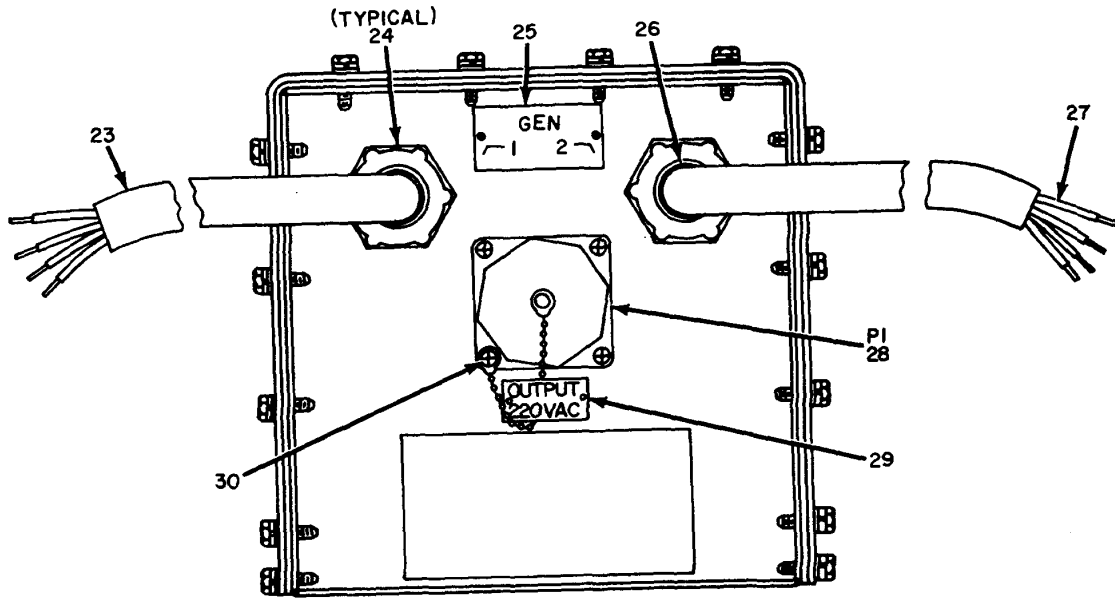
Generator Switch Assembly (Sheet 2 of 2).
